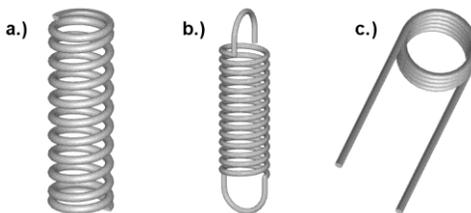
Compression spring (a), extension spring (b), torsion spring(c)
